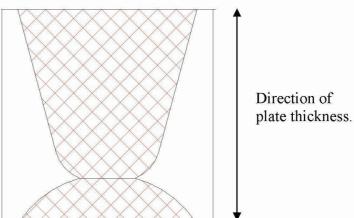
Cross-section of welded material test specimen showing weld material (cross-hatched) and base metal (not cross-hatched) within the square test specimen cross-section profile.
